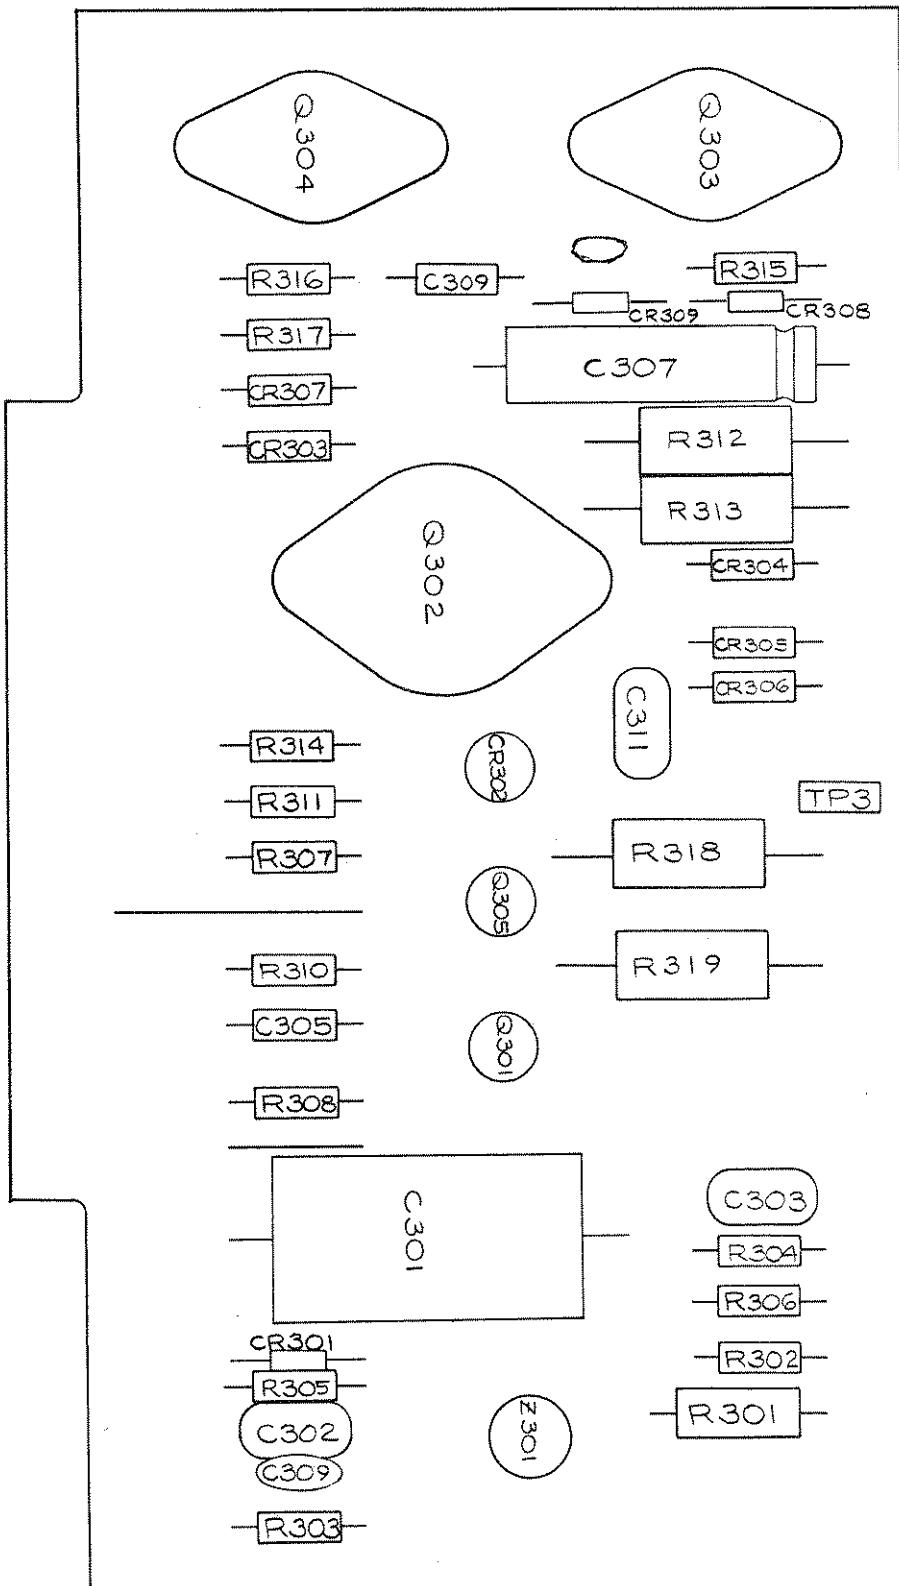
AMPLIFIER BOARD ASSEMBLY, MODELS 6226B, 6246B, 6225B, 6245B
